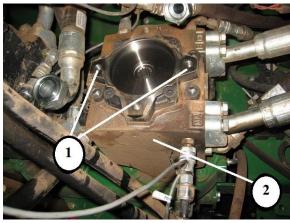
Main Hydrostatic Pump Key 1 – Mounting Hole Locations (M12) Key 2 – Main Hydrostatic Pump
